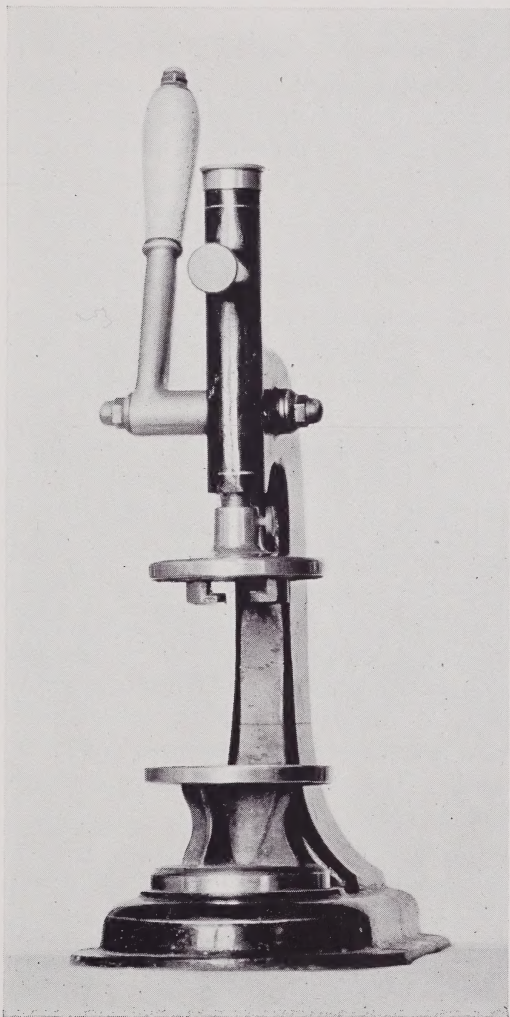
Taggart-type casting machine with attachment for holding flask fixed to the casting head.
